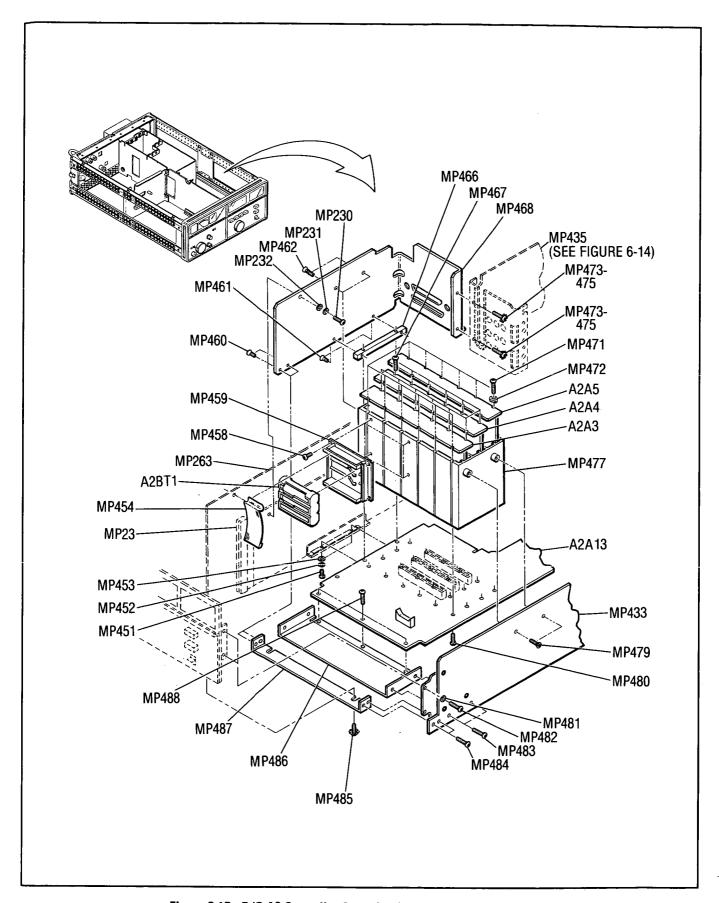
P/O A2 Controller Assembly Illustrated Parts Breakdown
